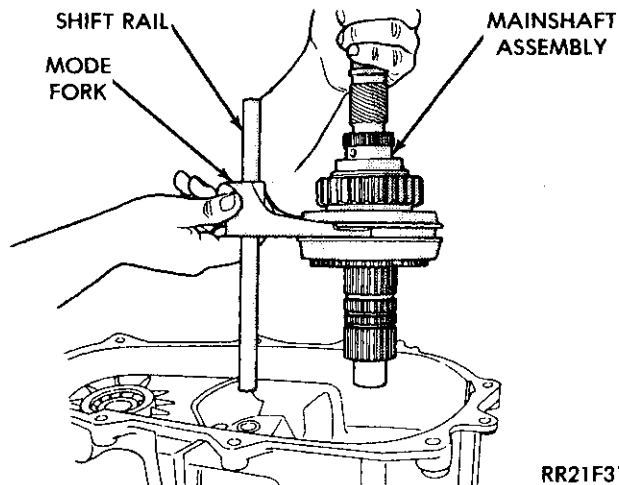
Installing Mainshaft And Mode Fork Assembly
